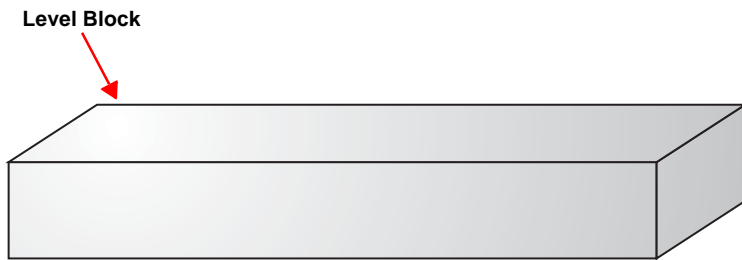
PF Roller Shaft Center Support Position Adjustment Jig and Level Block
